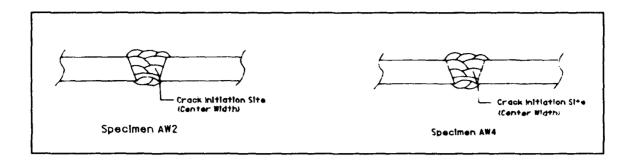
Failure Locations of Air Weld Specimens
